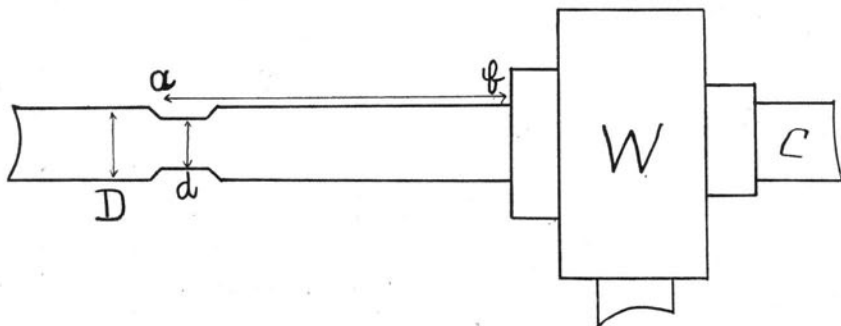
ALTERNATE BENDING TEST SPECIMEN
